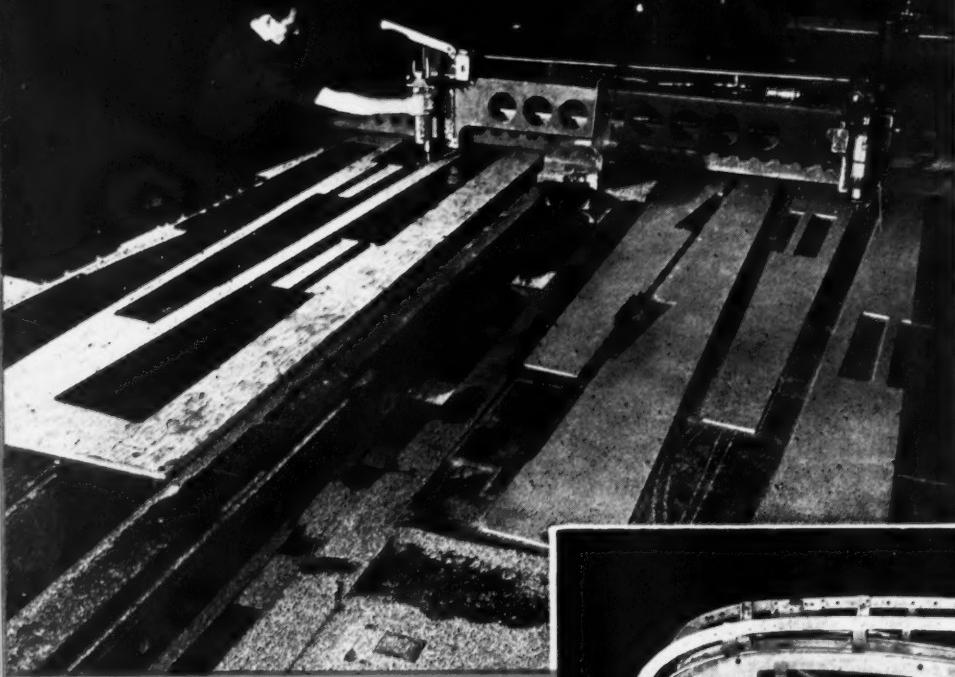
Cutting Edges of Templet Dies are Flame-hardened by Oxy-acetylene Torch. A Water Jet Following Flame Provides the Quick Cooling Necessary. Both Dies and Punches are Welded to Back-up Plates, Eliminating Dowel-pins and Hold-down Screws
